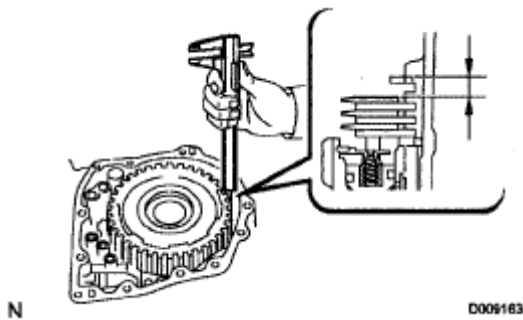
Measuring Distance Between Disc Surface And Snap Ring Surface
